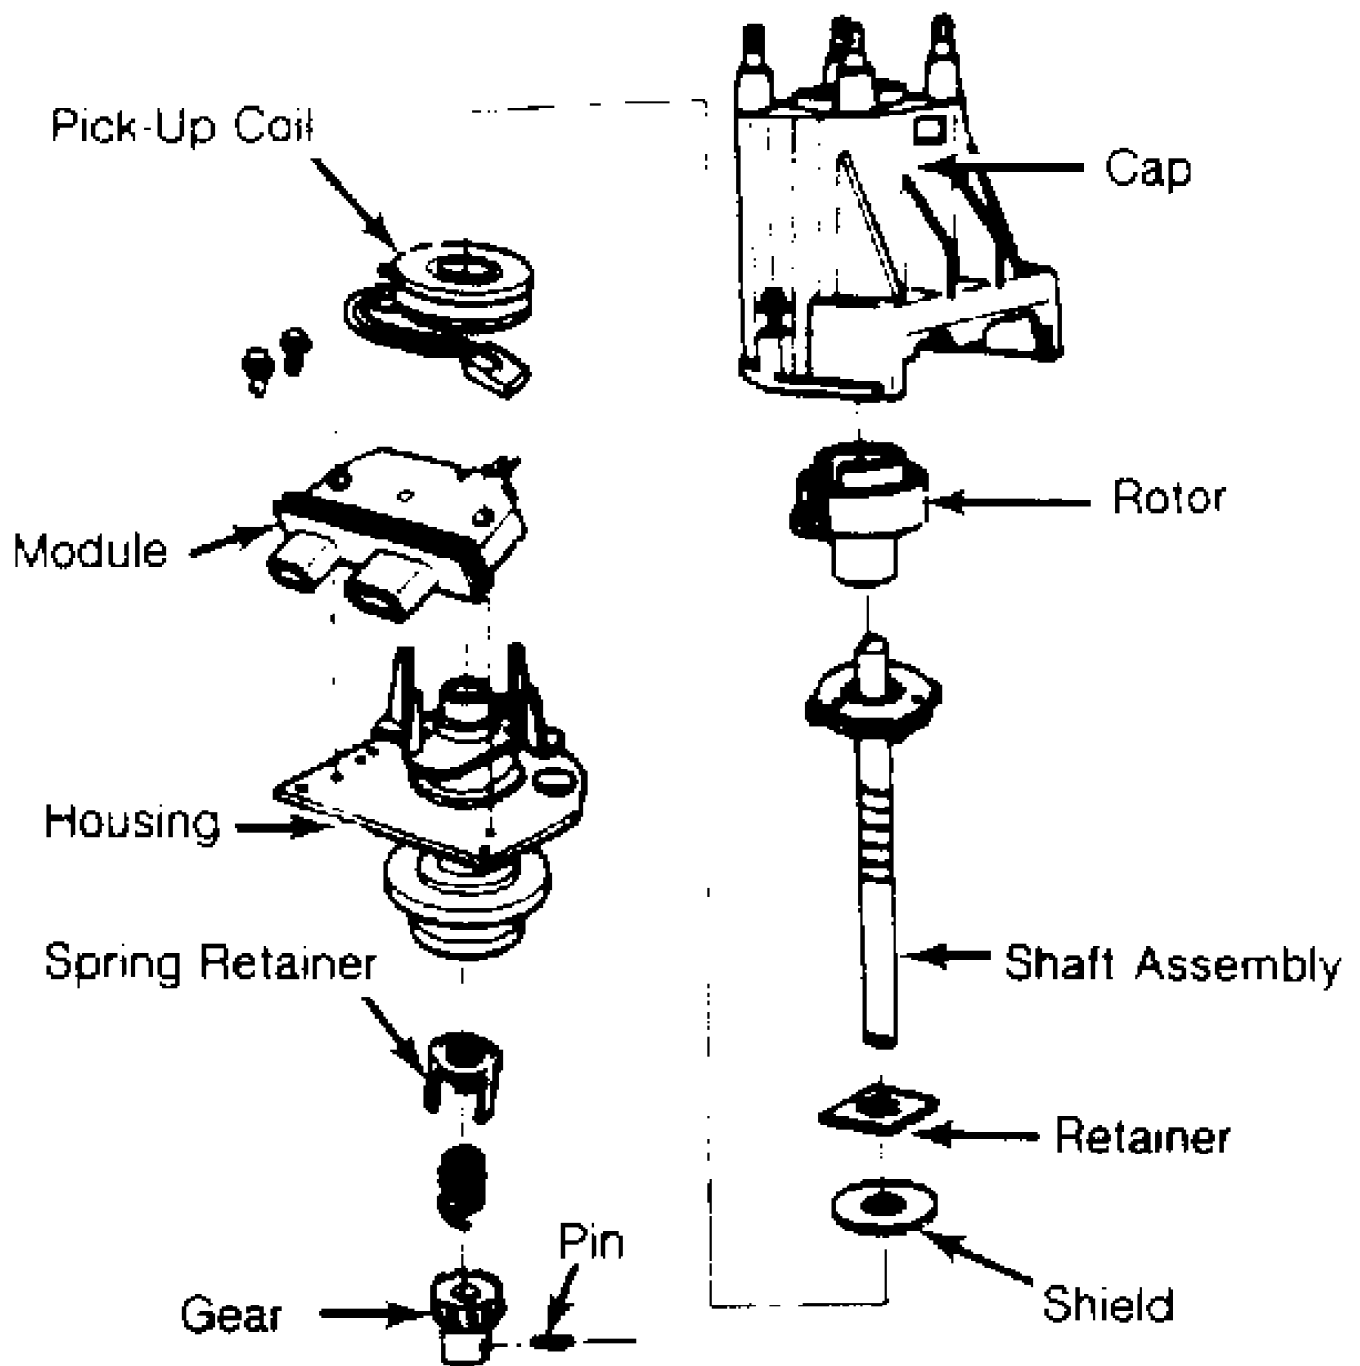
Exploded View of HEI-EST Distributor With Sealed Connector
